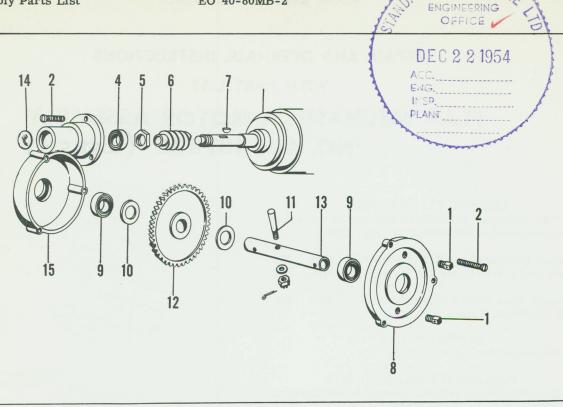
Flap Mechanism Motor Assembly - 404-187835
